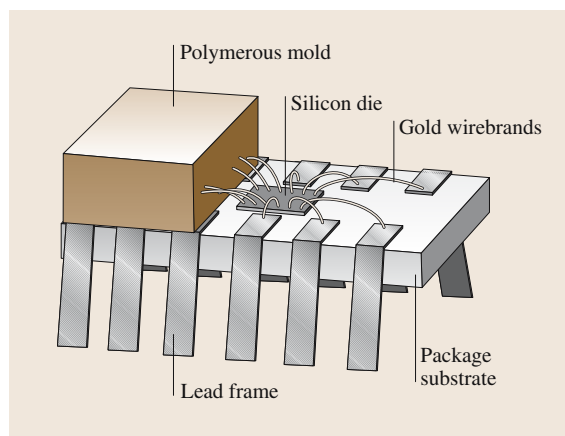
Isometric section schematic that illustrates a peripheral package showing a dual-in-line package (DIP) that is wirebonded
